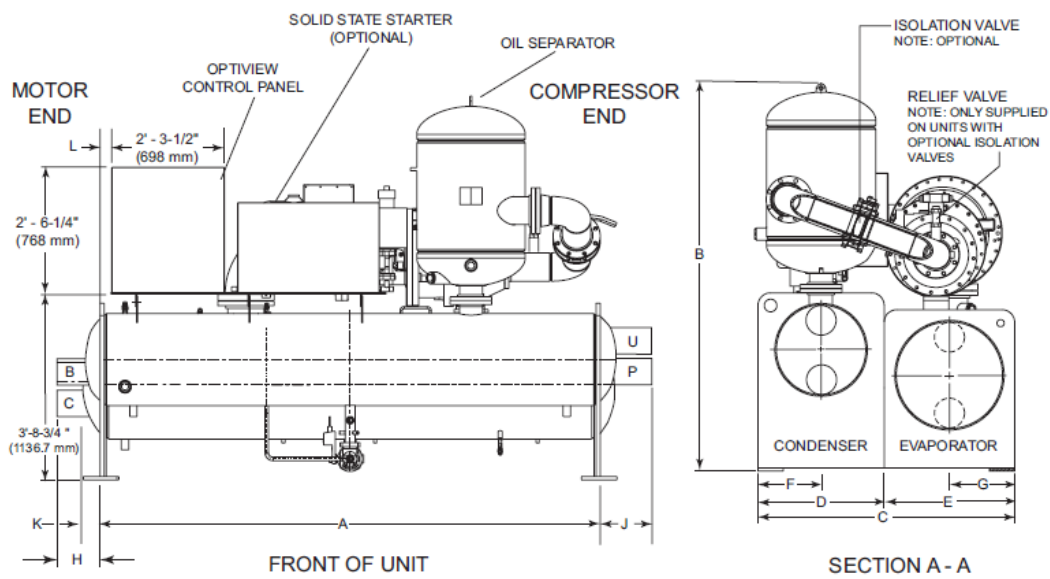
T0-T3 COMPRESSORS – EVAPORATOR, CONDENSER AND WATER BOXES DIMENSIONS
